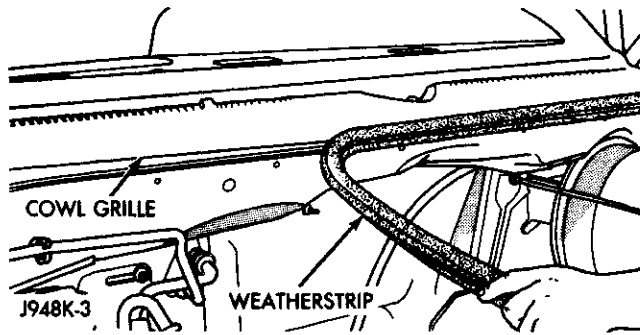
Cowl Plenum Cover/Grille Panel Weatherstrip
